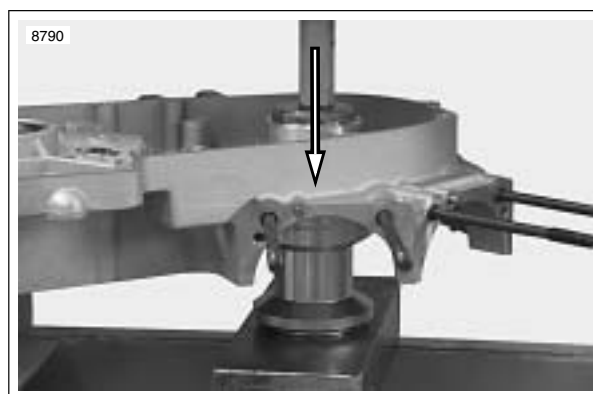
Direction of Bearing Removal From Left Crankcase
